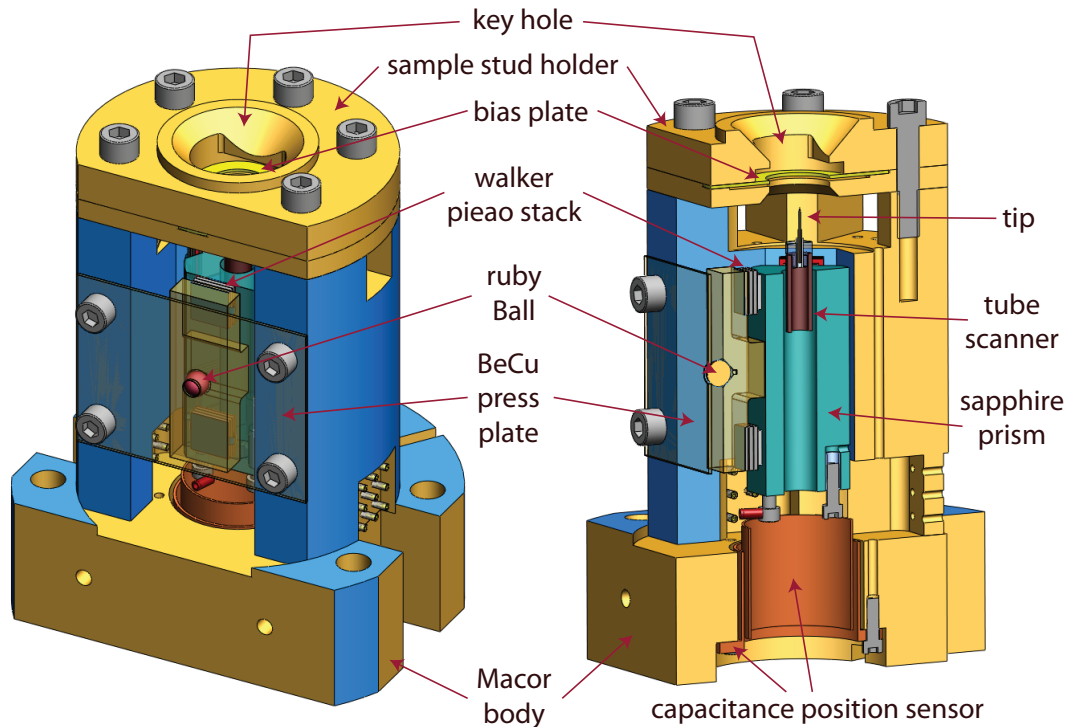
BNL STM1 head. (left) trimetric projection (right) cross-sectional view of the head design. Inverted T-shape tube scanner holder that fits into the sapphire prism center hole from the bottom is not drawn.
